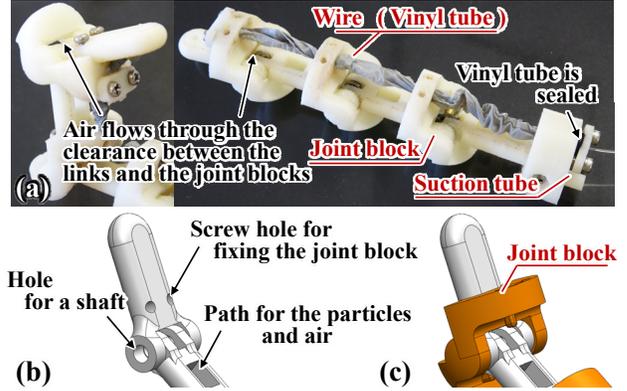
Skeleton of the finger: (a) photograph, (b) CAD model without a joint block, and (c) CAD model with a joint block.
